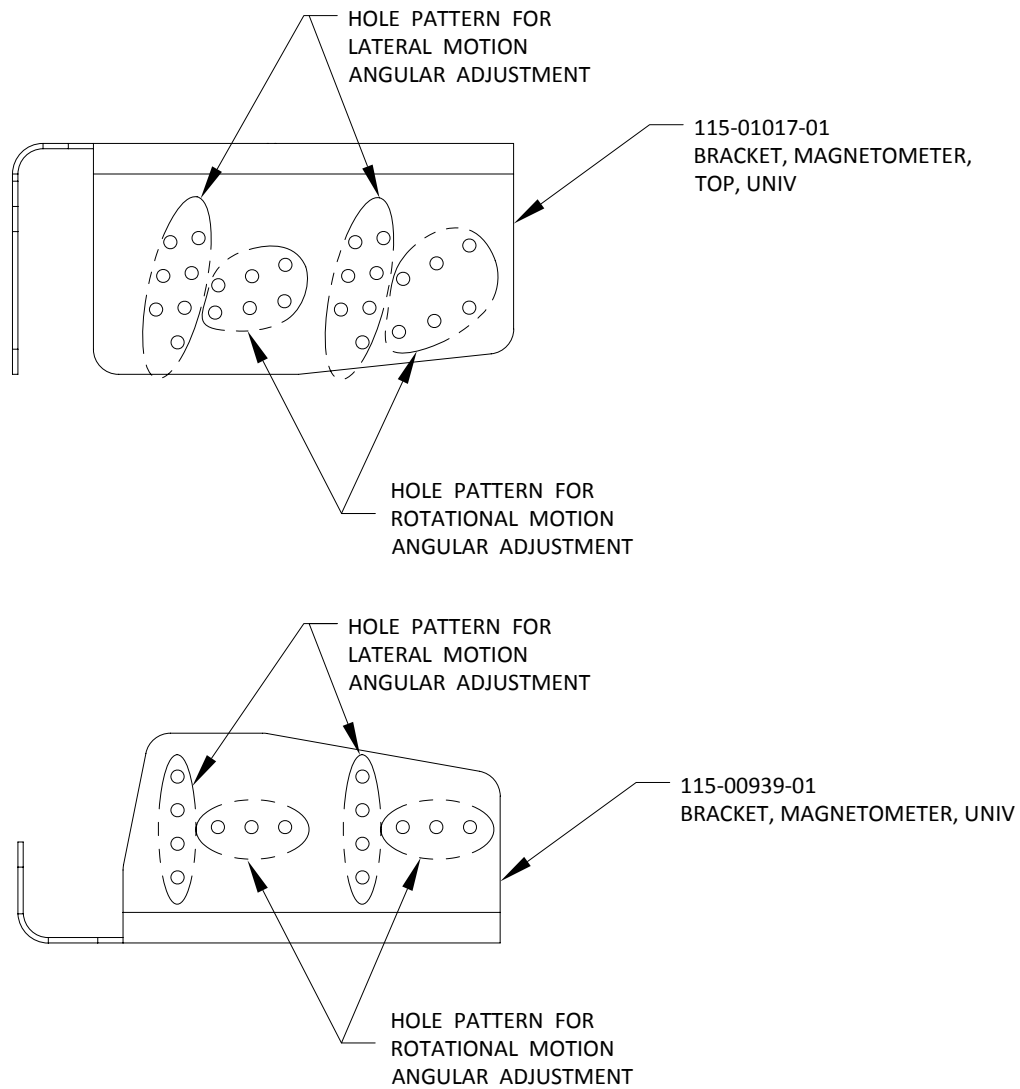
GMU 44 Universal Mount Top and Bottom Hole-Patterns
